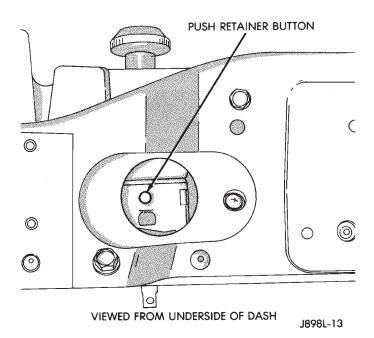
Headlamp Switch Shaft Removal—XJ Vehicles
